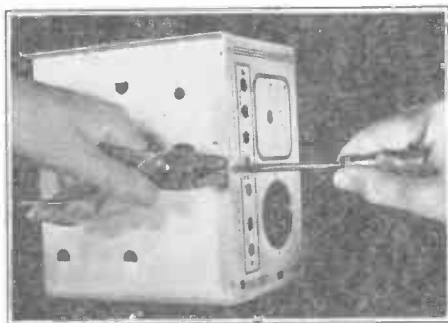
Fasten the front panel to the chassis exactly as shown here. Use a medium-size screwdriver to tighten each screw while holding its nut with ordinary pliers.
